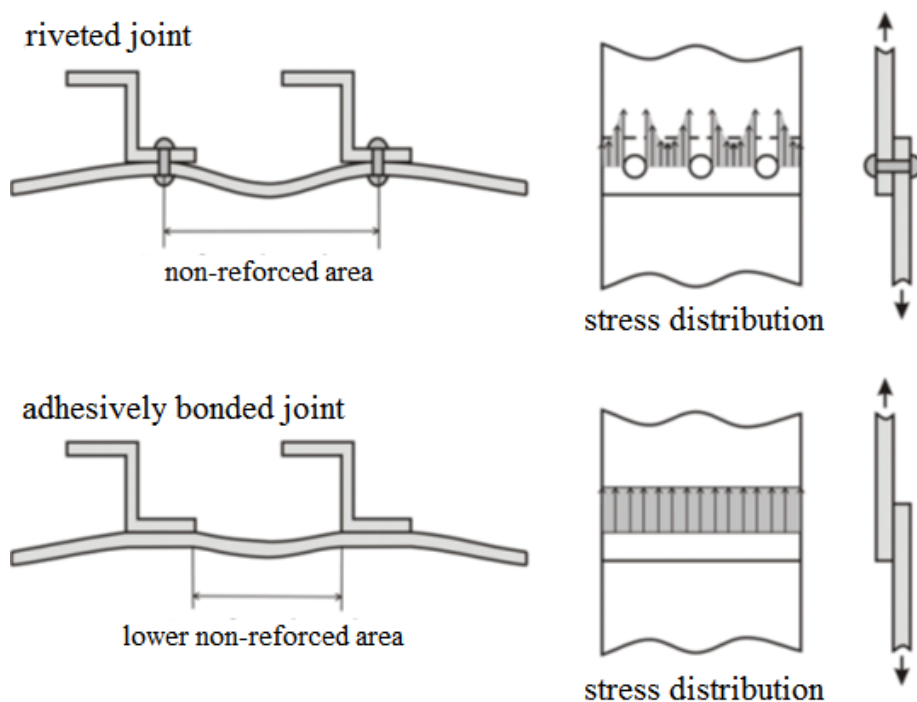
Comparison of two stress distributions caused by tension on a sheet part with a traditional riveted assembly and an adhesive bonded assembly [2].
